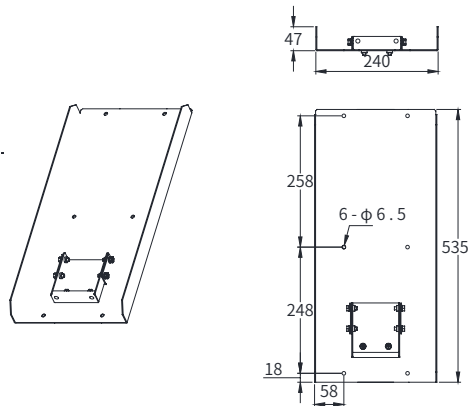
Lower dimensions of T2 quick mounting kit (unit: mm)
